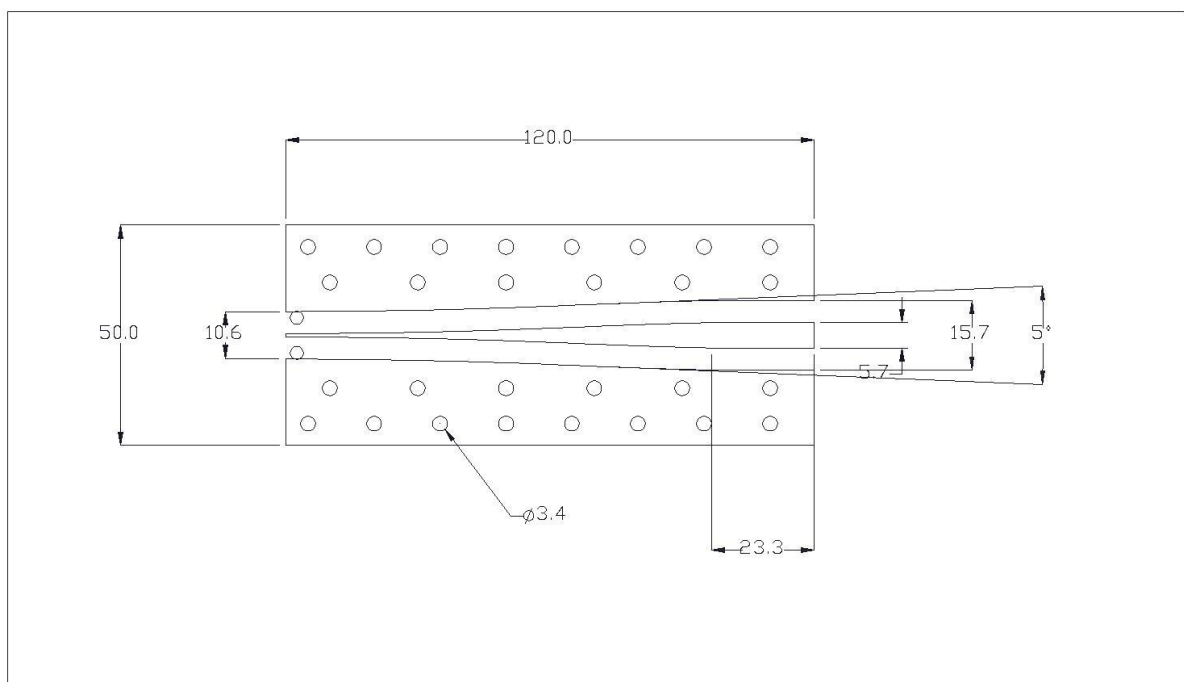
Figure Showing Klopfenstein Taper Profile of BLF2045 and BLL1214-35 measurement fixtures including mounting holes for screws.
